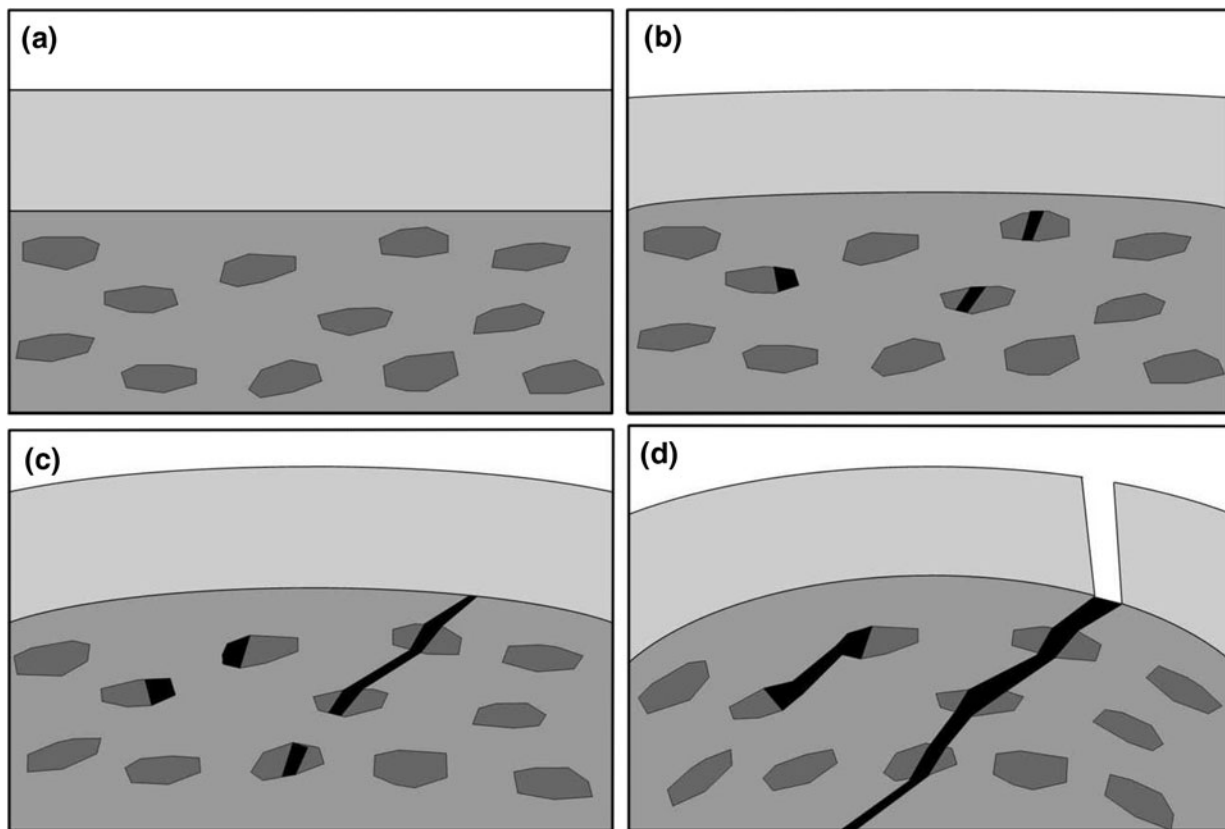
Schematic of bend fracture path progression, (a) through (d), in clad sheet.
